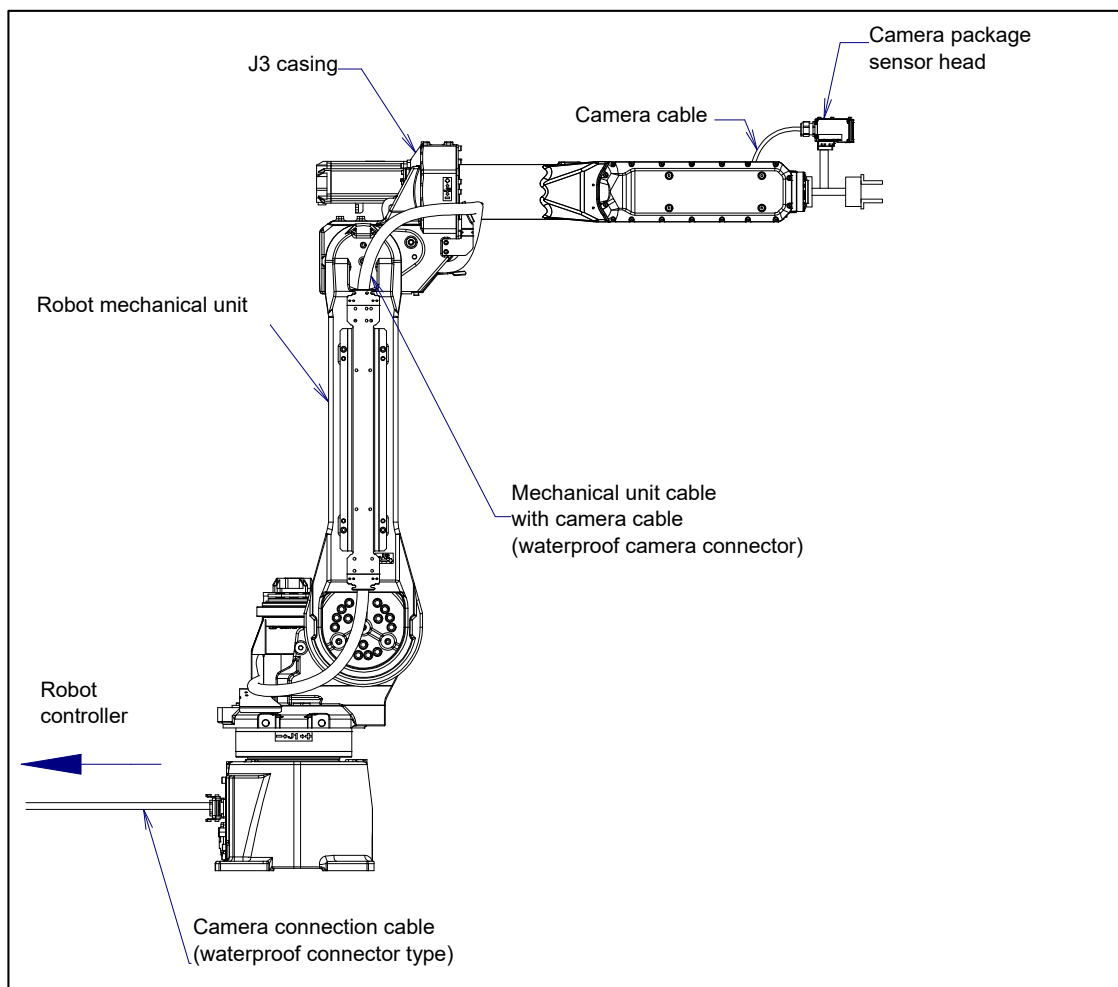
(a) Configuration of the camera package (hand camera)
